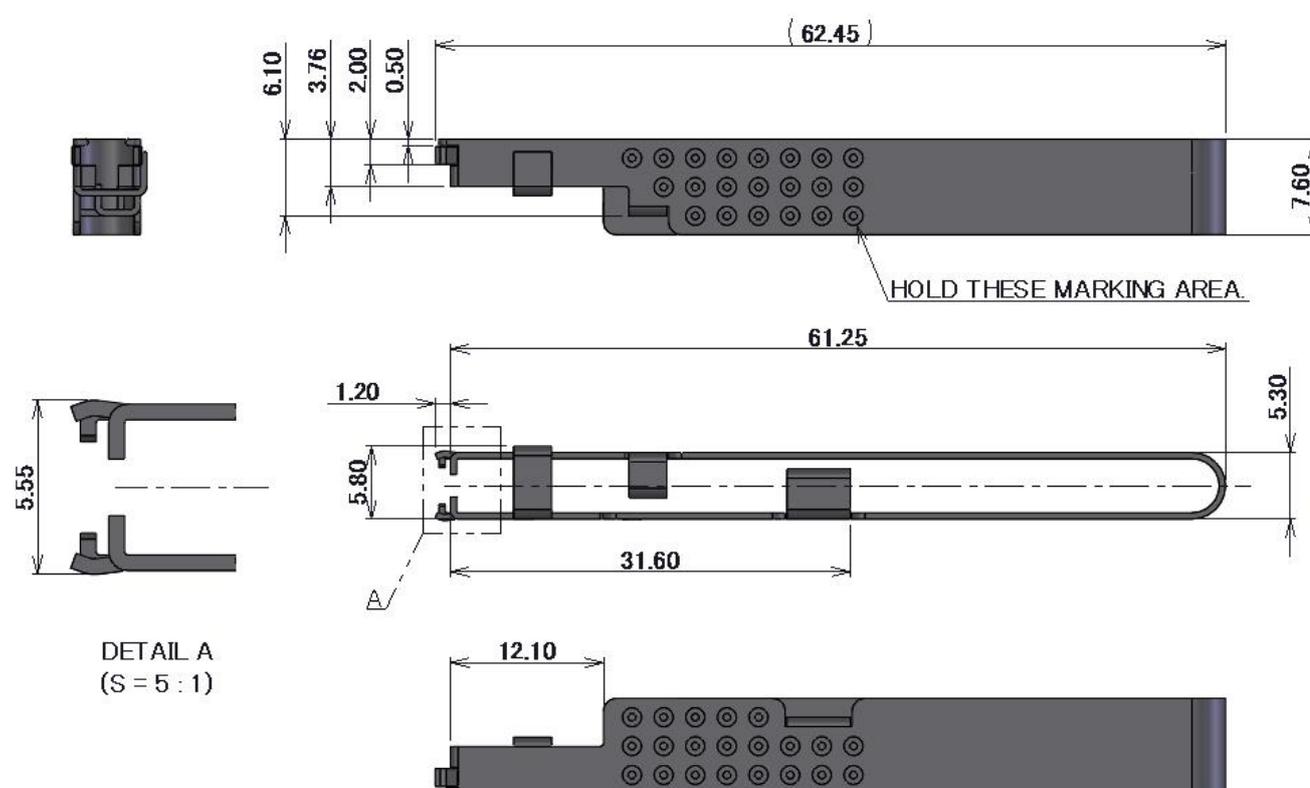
HF 4L LK Hand Tool Jig Narrow Pitch Type
